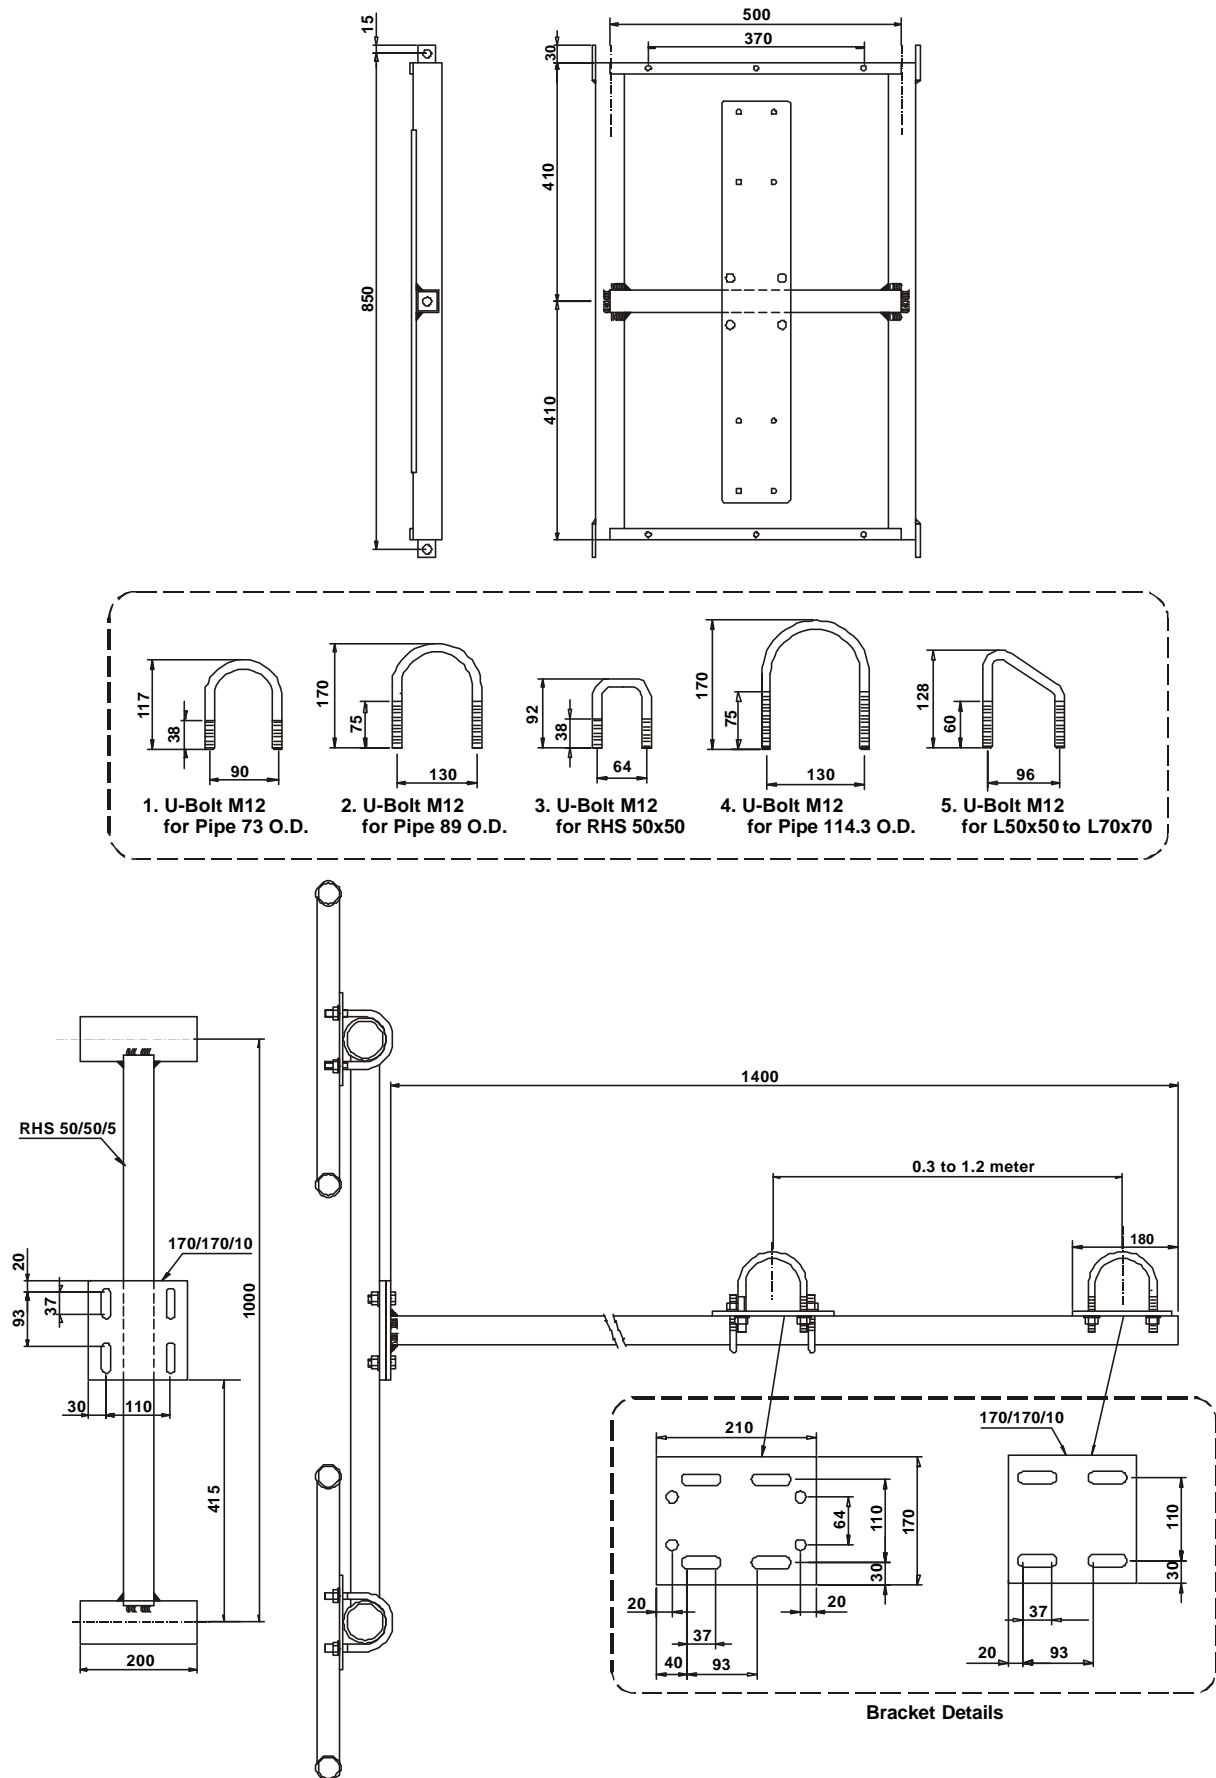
Narrow H-Supports and Accessories for Tower Mounting, Option 1, Mechanical Details
